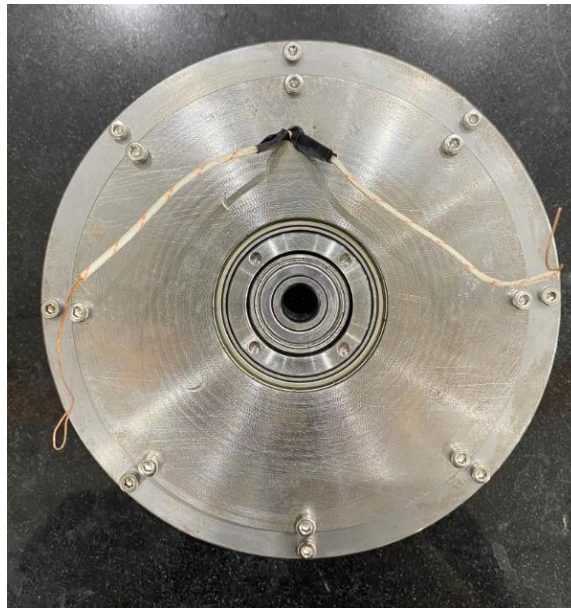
Prototype of tooth-shaped magneto-rheological brake
